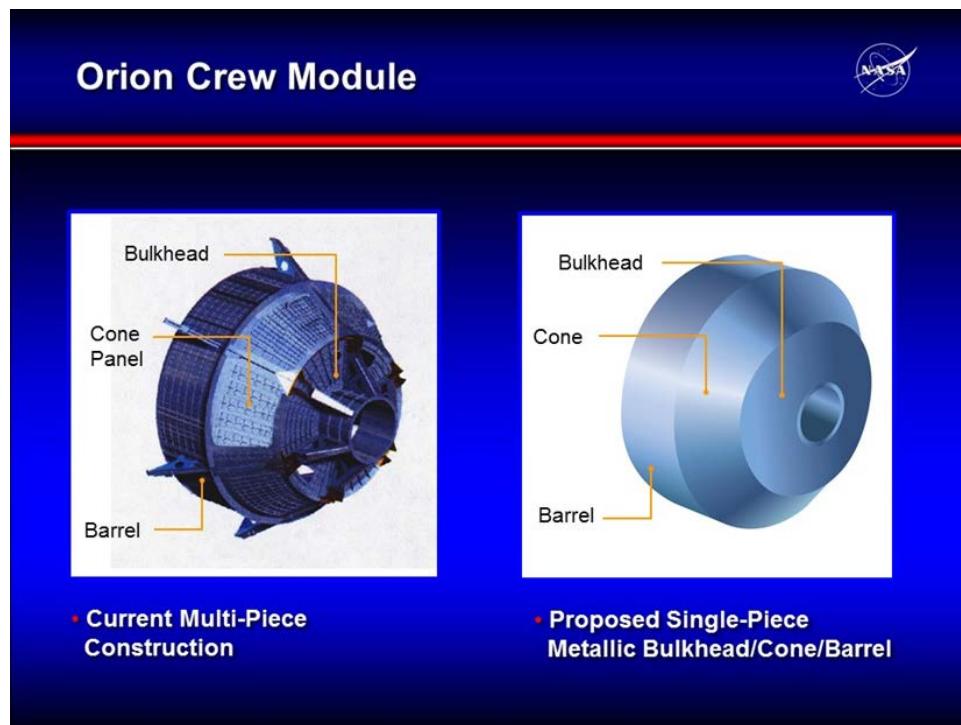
Concept for a Single-Piece Spin-Formed Single-Piece MPCV Forward Pressure Vessel Bulkhead.
